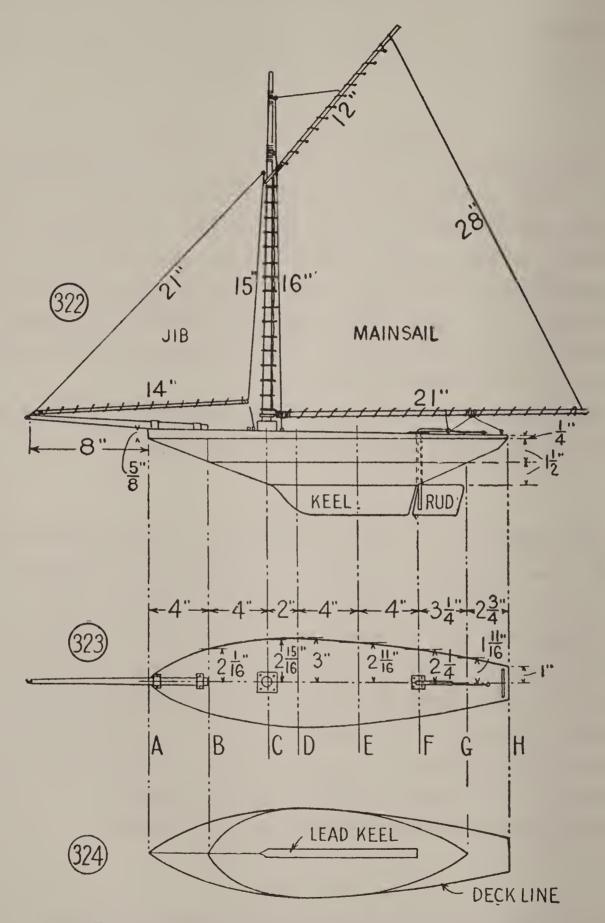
Side Elevation of 24-Inch Model Yacht. Fig. 323.—Deck Plan. Fig. 324.—Keel Plan.
